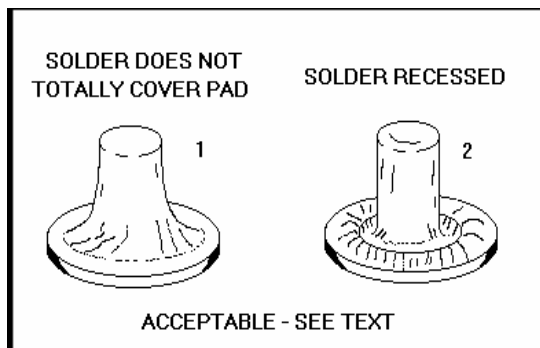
shows two acceptable solder joints. The less than ideal solder joint, although starting to form a ball, still has proper wetting at both the solder pad and the component lead. Note that the solder has not extended outside the diameter of the solder pad.
